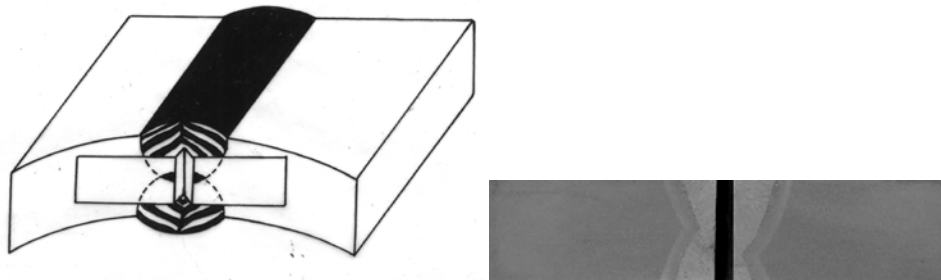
Details of extraction of Charpy V-notch specimens from weld metal
